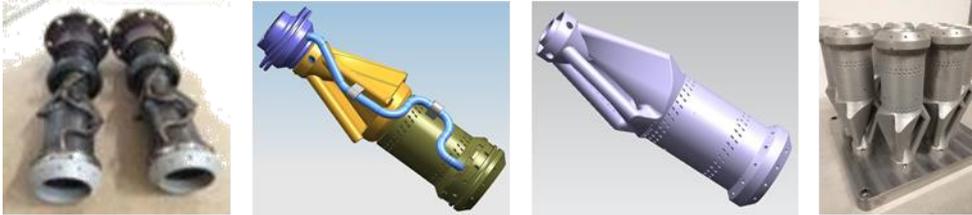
Fuel burner design progressions from welded (far left) to SLM additive manufacturing (far right) for 3rd generation DLE burner
